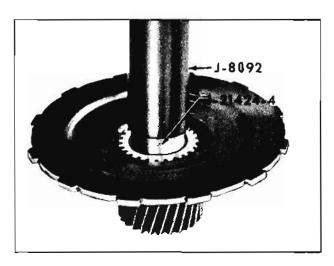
Removing Low Sun Gear and Flange Assembly Bushing
